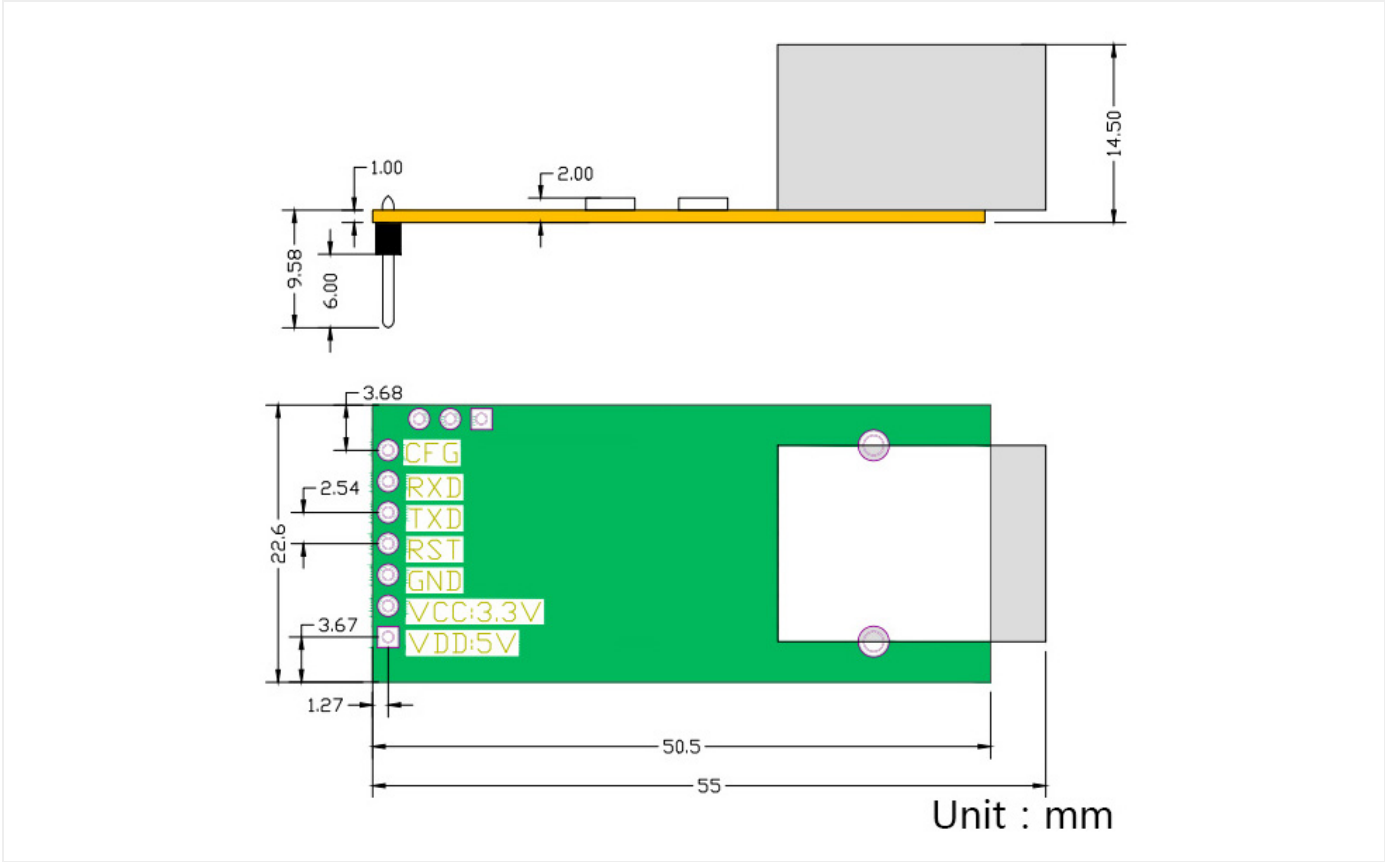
Detailed dimensions of the module in millimeters, showing pin spacing and overall size.
